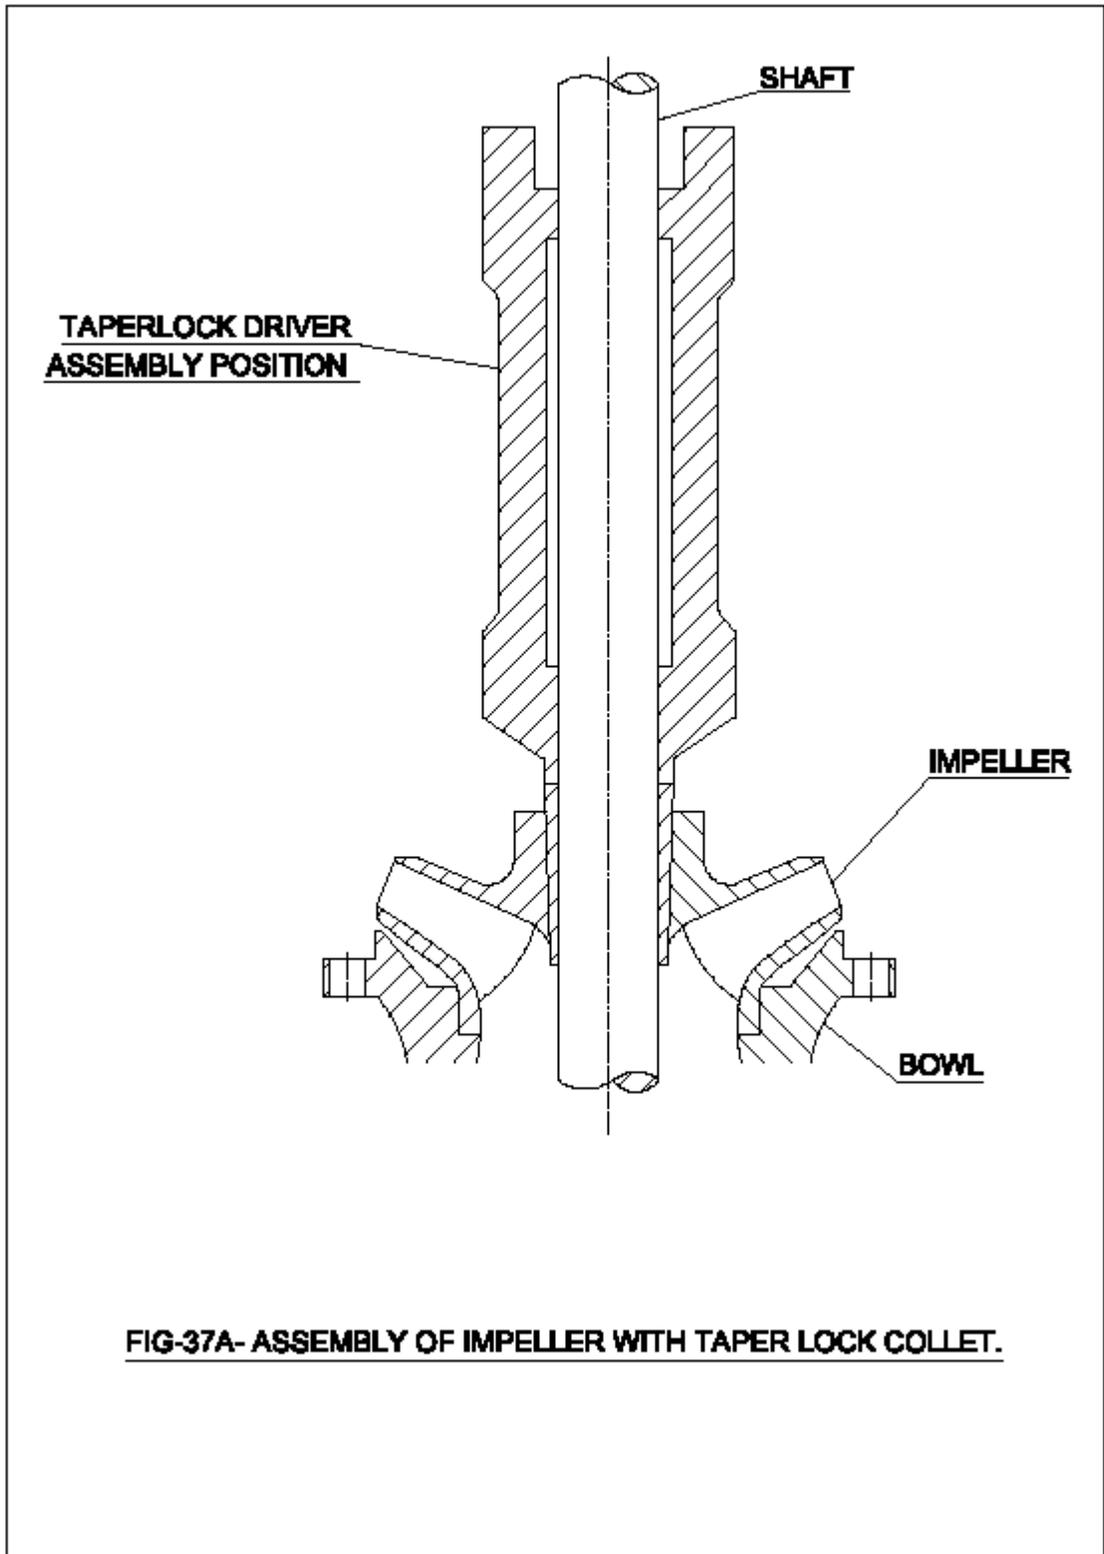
A- ASSEMBLY OF IMPELLER WITH TAPER LOCK COLLET.
